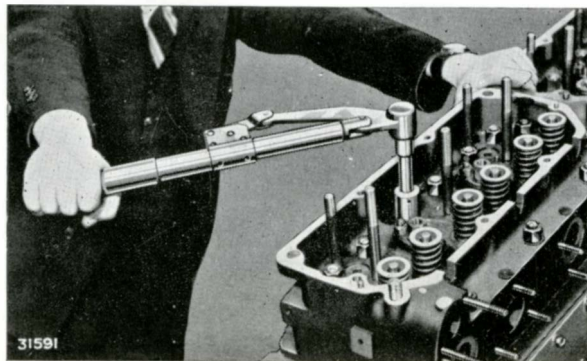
TIGHTENING CYLINDER HEAD NUTS USING A TORSION SPANNER
